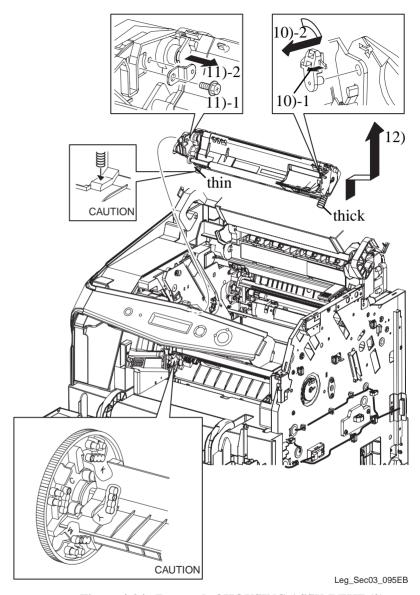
Removal of HOUSING ASSY-DEVE (2)
